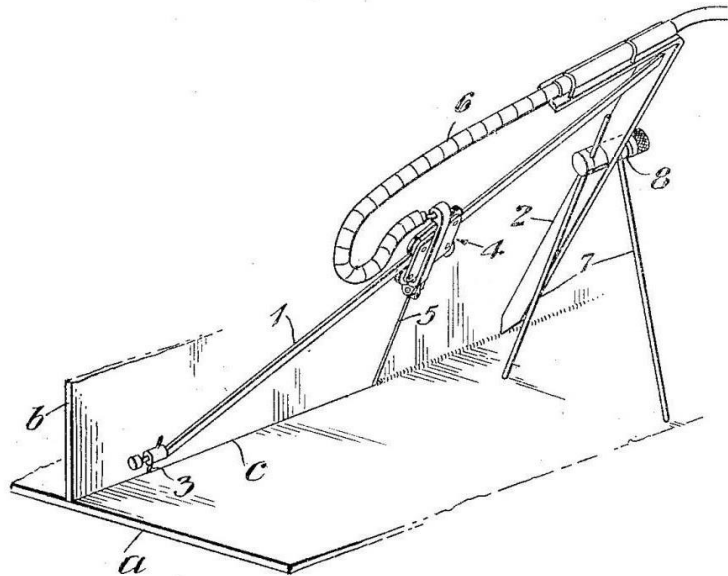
design appearance of the unit for gravity welding of t-joints
